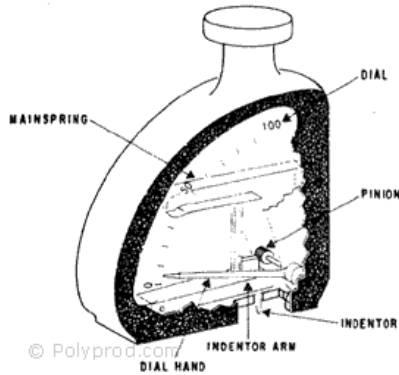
SCHEMATIC DRAWING POCKET-SIZE DUROMETER
